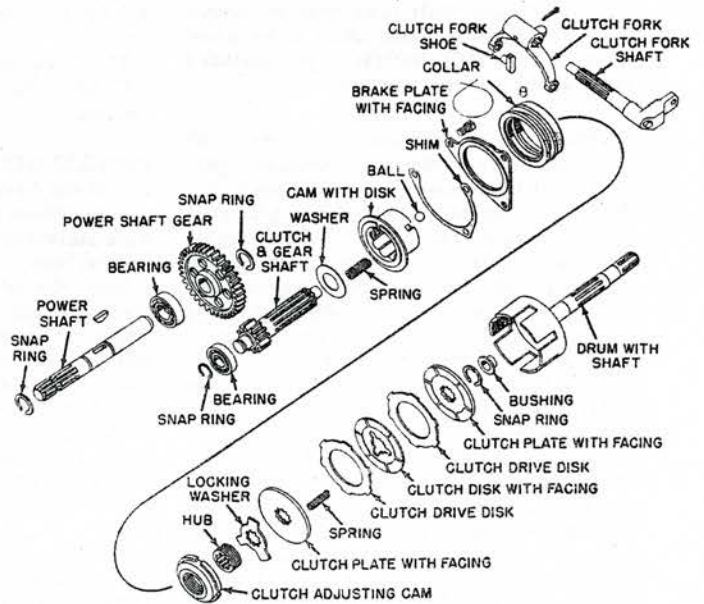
D Exploded view of Model 60 engine-driven power shaft and clutch. Model 50 is similar
